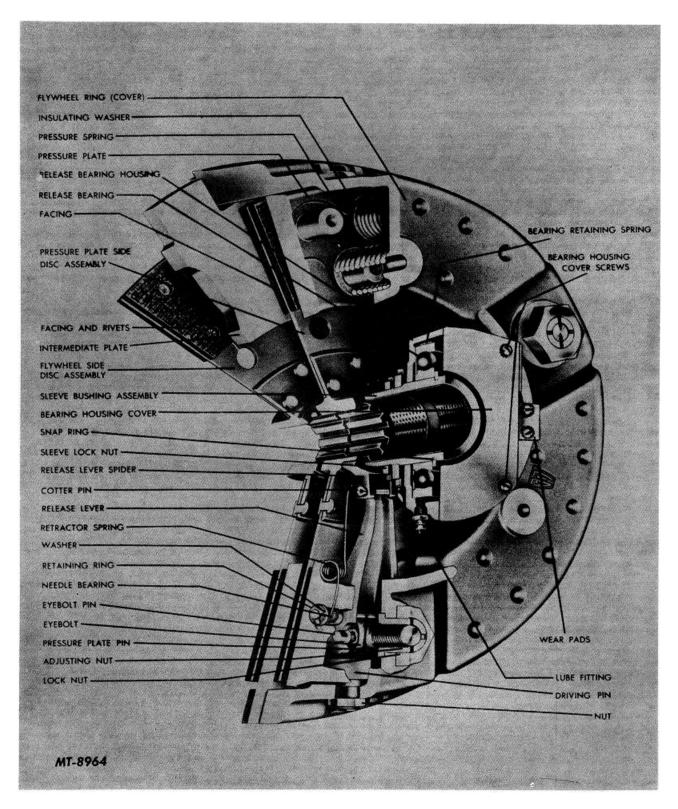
Cutaway View of 15-1/2 Inch LP, PT Type Clutch
